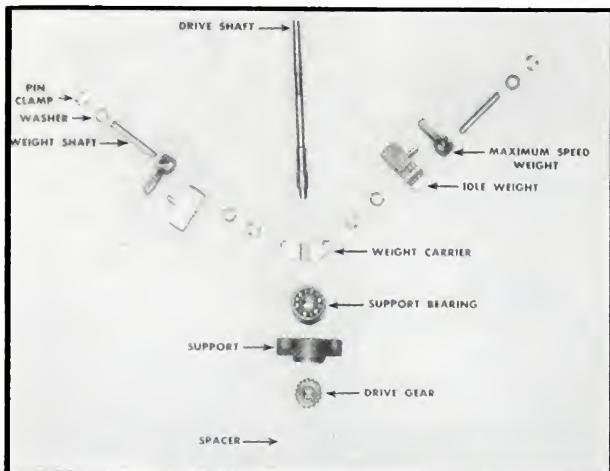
Exploded view governor weight carrier support and drive shaft
